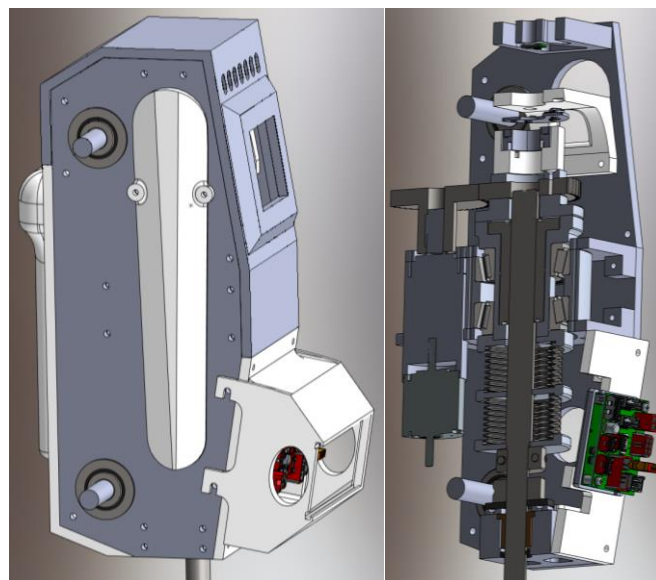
Steering Assembly CAD (Left) and Steering Assembly CAD Cross-Section (Right) by Chris Brindle
